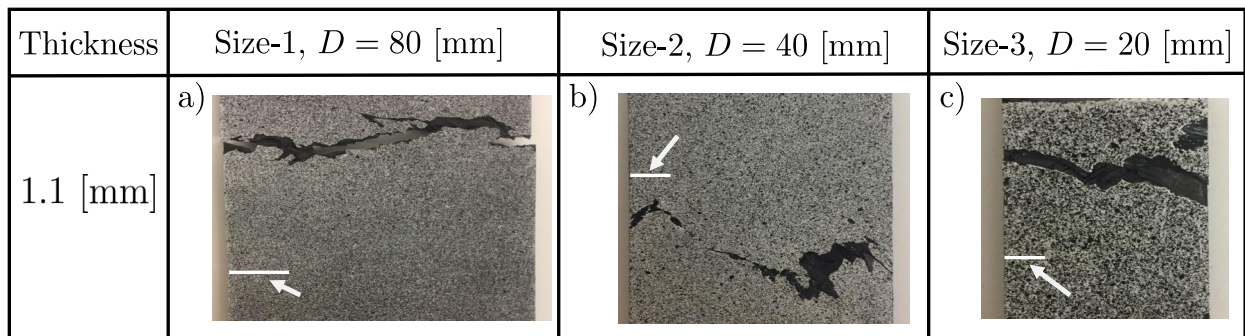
Representative fracture surfaces of Single Edge Notch Tension specimens for the thickness of 1.1 mm. As can be noted, most of the fractures were triggered far from the notch.
